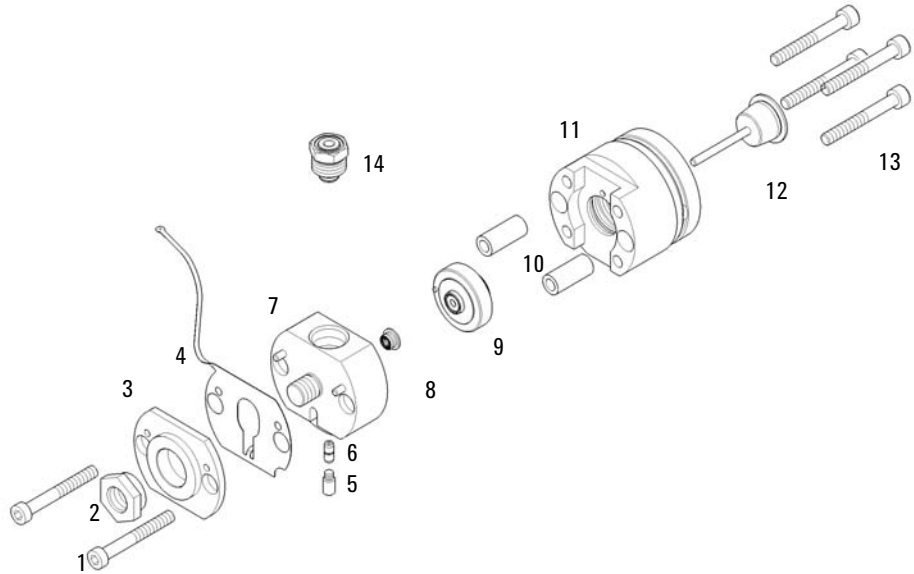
Secondary pump head (Quaternary Pump) with seal wash
